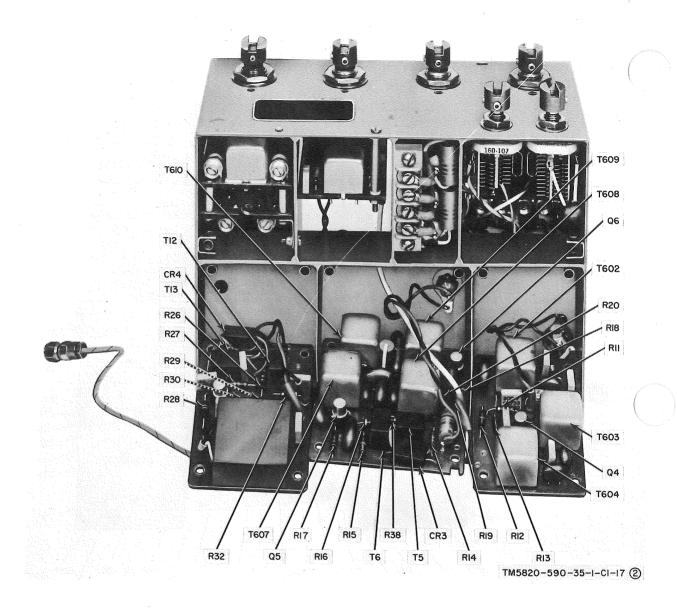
Frequency synthesizer module, bottom view, circuit boards removed (part 2 of 2).
